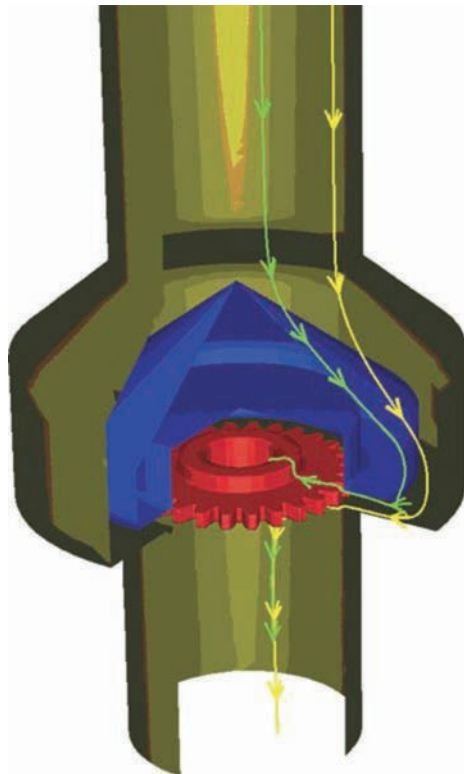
Cutaway view of the quench fixture showing the gear (red), upstream reflector (blue), and representative water path lines passing over and under the gear (green, yellow). Adapted from Ref 34
